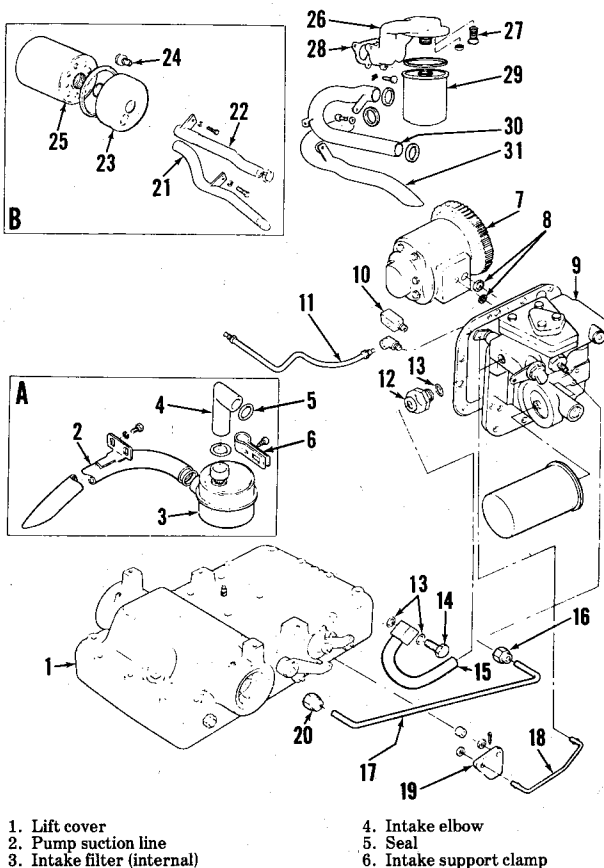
View showing connections between lift cover and pump adapter plate. Pump (7) mounts on adapter plate (9). Flare nut (20) connects pilot line to pilot pressure sleeve (18—Fig. 221) and hollow bolt (14) connects system pressure tube (15) to pressure sleeve (10—Fig. 221). Components (26 through 31) are used on Models 8700, 9700, TW-10, TW-20 and TW-30; items in insets (A or B) are used on other models.
